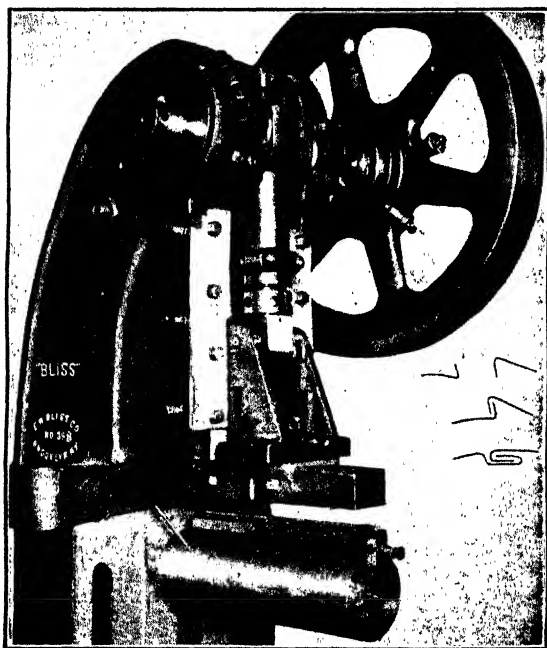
Forming and closing a lock seam on a duplex horn.
